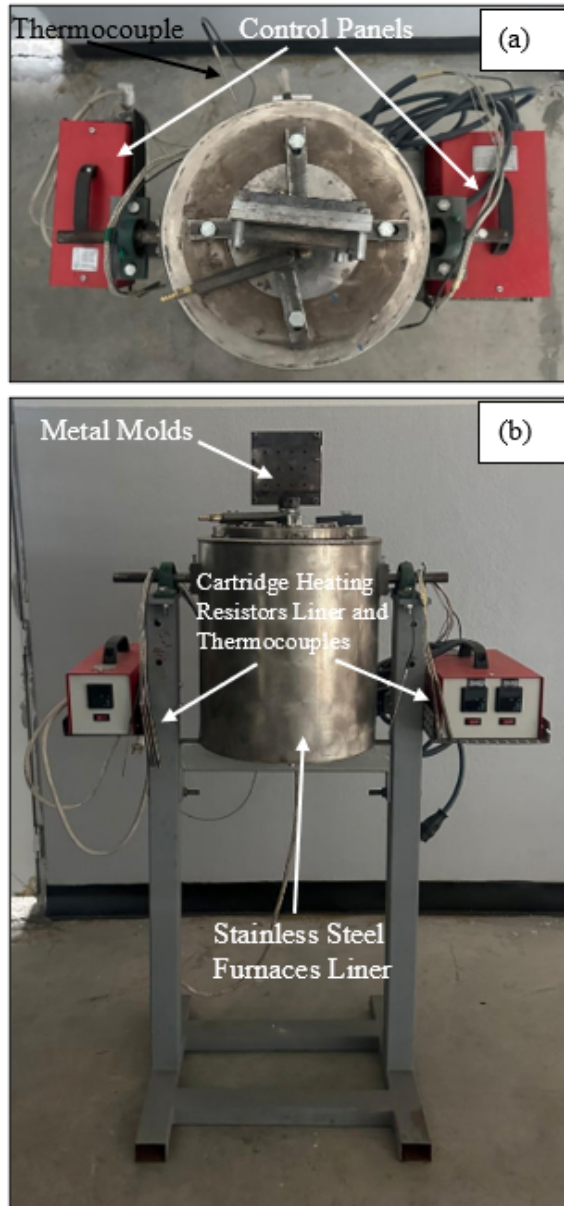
General front (a) and top (b) views of the Low Pressure Die Casting (LPDC) machine designed and fabricated in this study.
